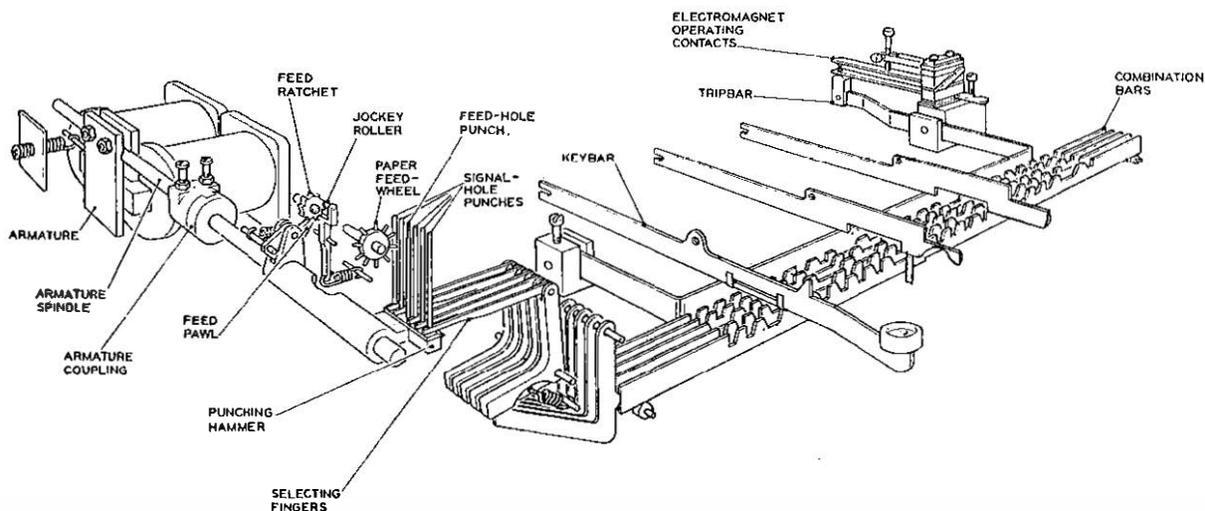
SELECTING AND PUNCHING MECHANISM OF PERFORATOR NO. 44.
